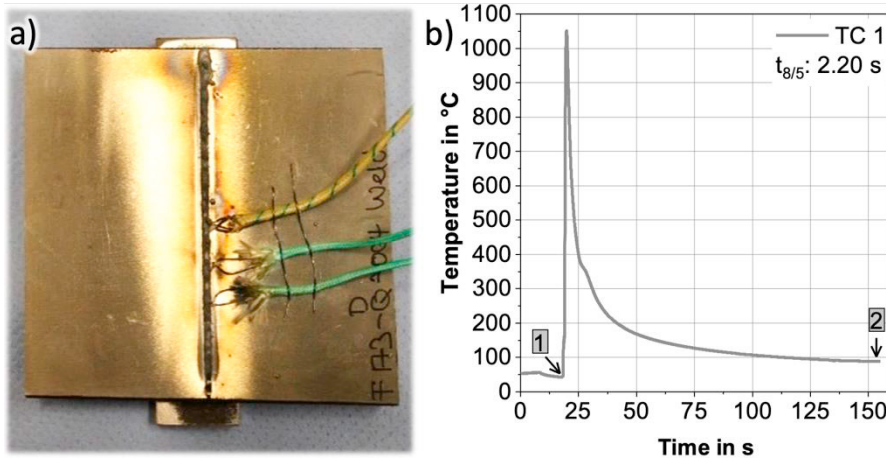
a) Welding setup with thermocouples, and b) temperature history next to fusion line.
